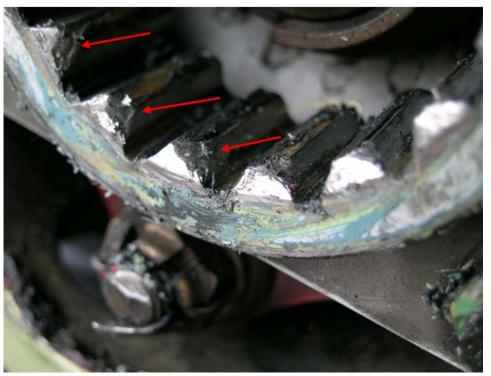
The arrows clearly show damage to the splines in the tail rotor gearbox.
